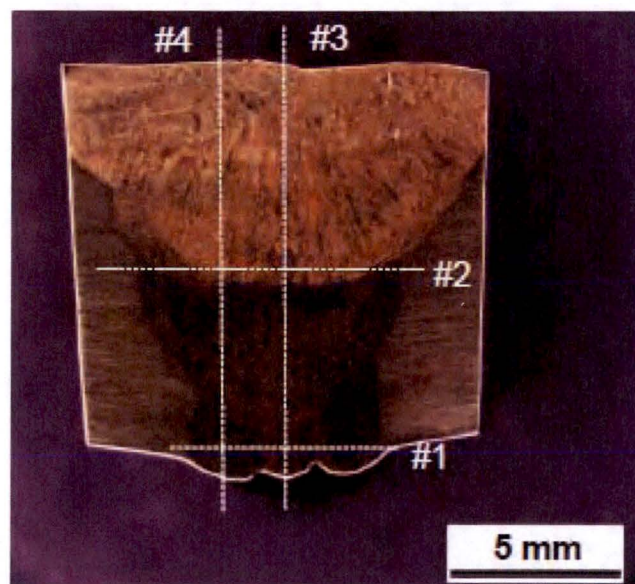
Sample 2 – 10-inch Weld Cross-Section
